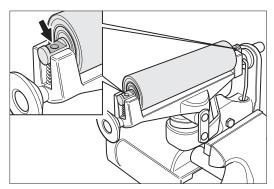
Insert the new tensioning roller, ensuring that the surfaces on the shaft ends are pointing upwards
